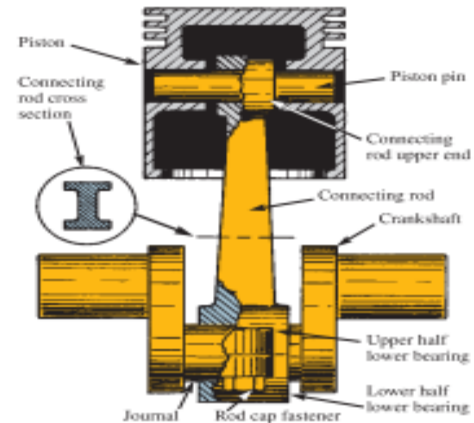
Connecting rod attaches piston tocrankshaft. Bearings are used at both ends of rod toreduce friction
